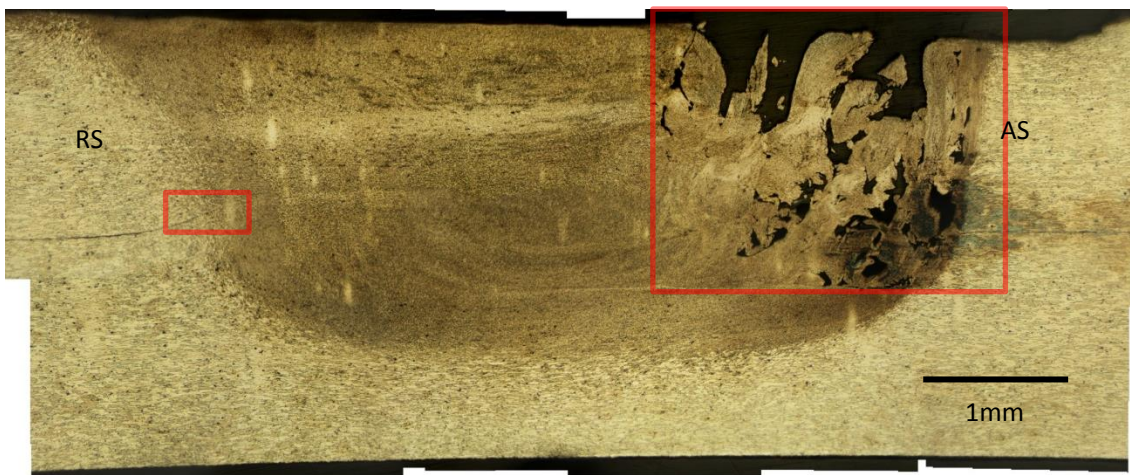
Metallographic picture of SSFSW #3799 welding sheet cross section at 1500 rpm, 8.47 mm/sec, 14.23 kN tool 3(LH)
